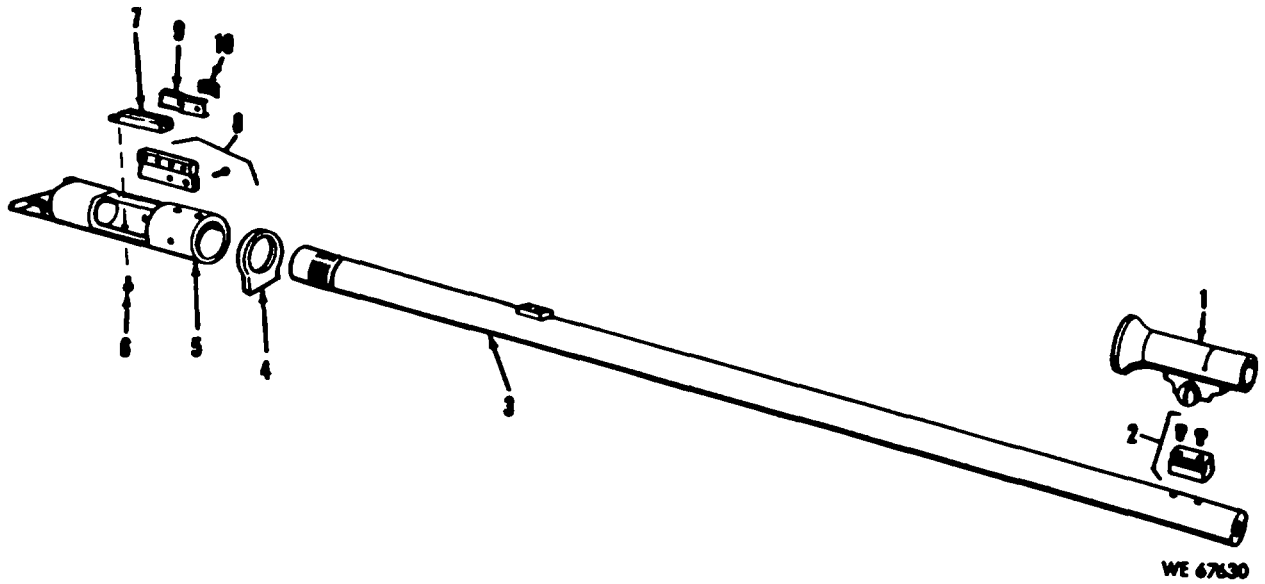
Barrel and receiver group for Caliber .22 Remington Rifle, Model 40X-H1, single shot - exploded view.
